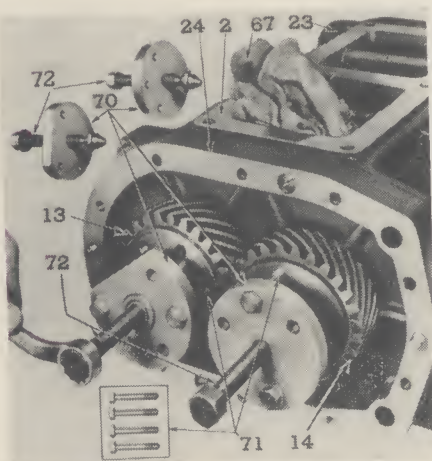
B—Showing puller set-up to remove blower rotor timing gears. A clean rag (67) placed between the rotors prevents their turning when removing the gears.
